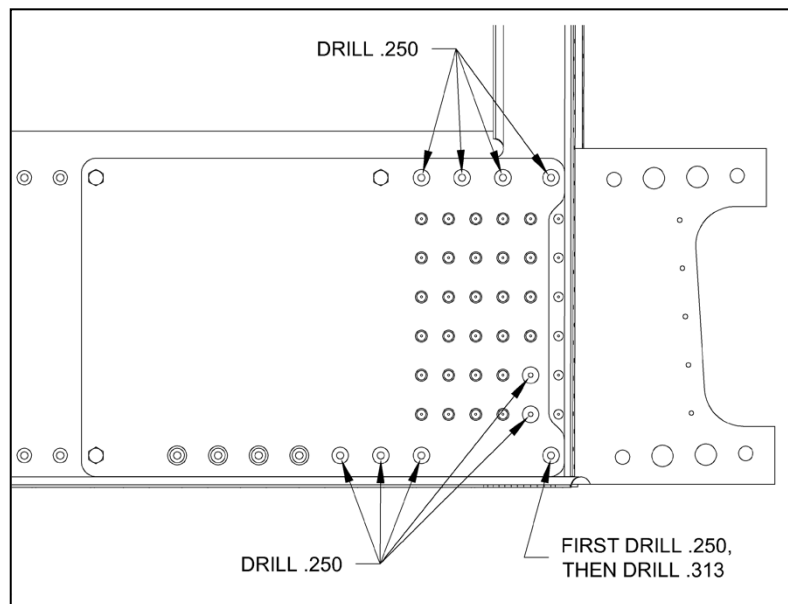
REMOVING RIVETS FROM BULKHEAD
